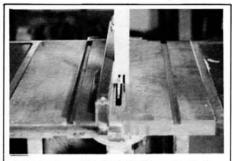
Photo A — Stock is held against ripfence to cut spline grooves. Table saw is equipped with a ¼ in. dado-head cutter.
